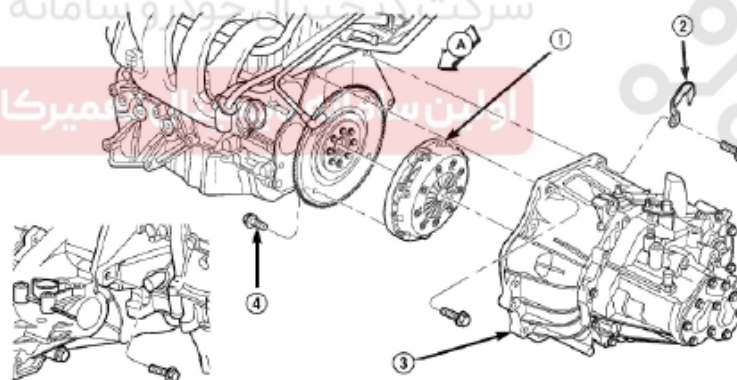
Disassembly/assembly of transaxle — 1.6L
